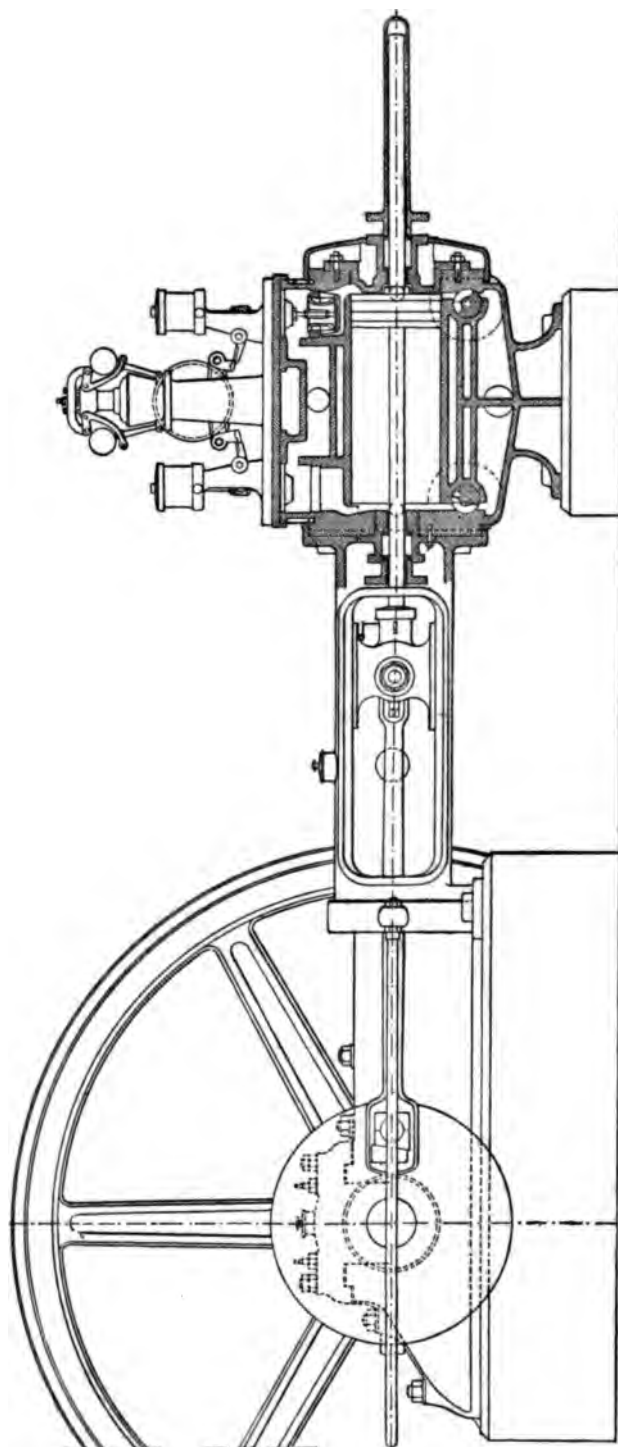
Procil and Scharowsky: Horizontal Steam Engine. Sectional Elevation. Scale 1/32th.
